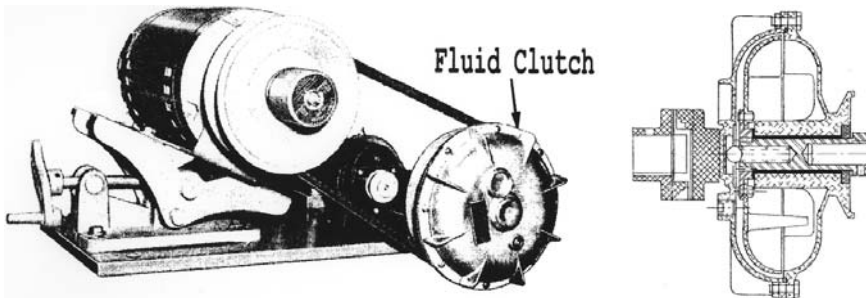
Photograph of a fluid clutch with input from an electric motor and a belt drive using the sheave that is a part of the right-hand side of the housing, shown in cross section. (Courtesy Fluid Drive Engineering Co., Inc., Burlingame, CA.)
